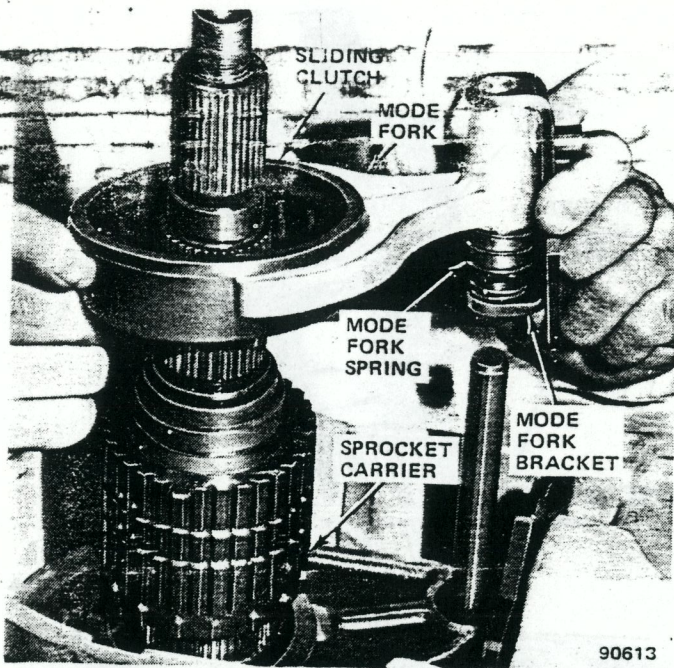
D-18 Mode Fork, Spring, Bracket and Sliding Clutch Removal/Installation
